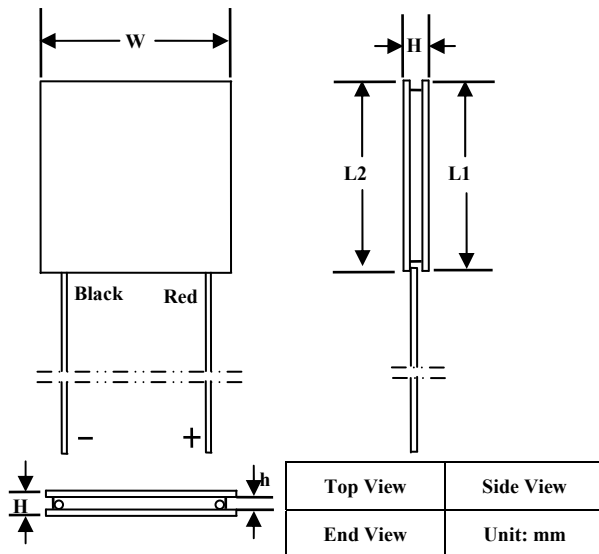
Mechanical Dimensions of Sealed ATE1-71
